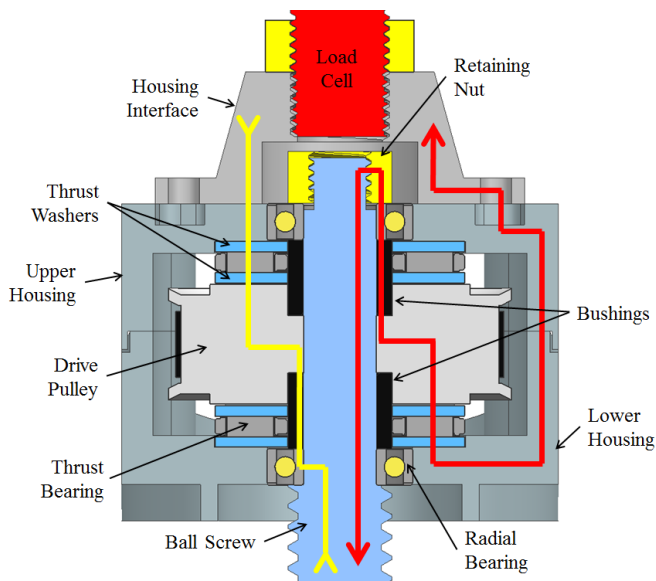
Cutaway view of bearing housing, showing the compression and tension load paths. Each load path is symmetrical
